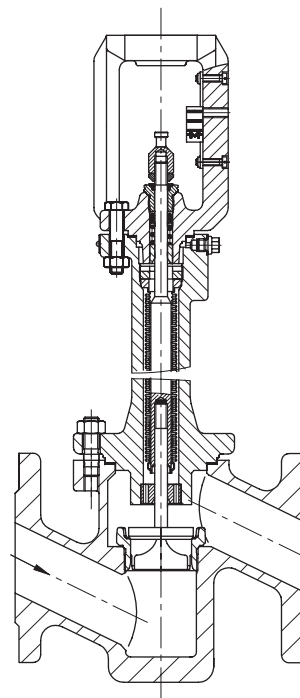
Type 3241 Valve, forged steel version, DN 15A to 80A, with bellows seal
